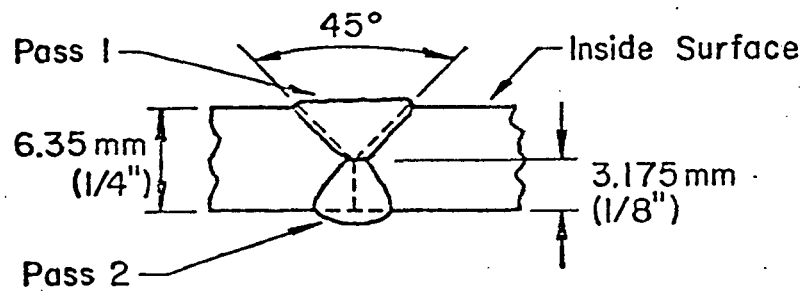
Welding Details for Specimens P1 and P3
